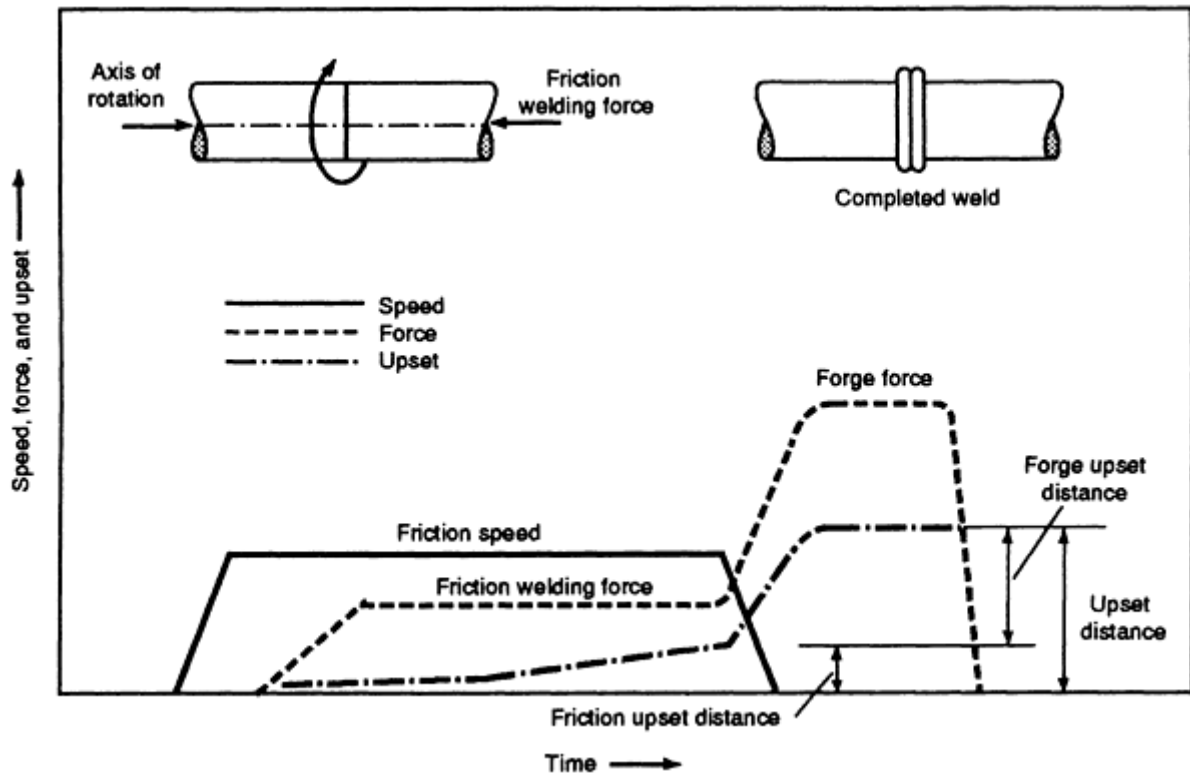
DIRECT-DRIVE FRICTION WELDING PARAMETER CHARACTERISTICS. SOURCE:ANSI/AWS C6.1-89
